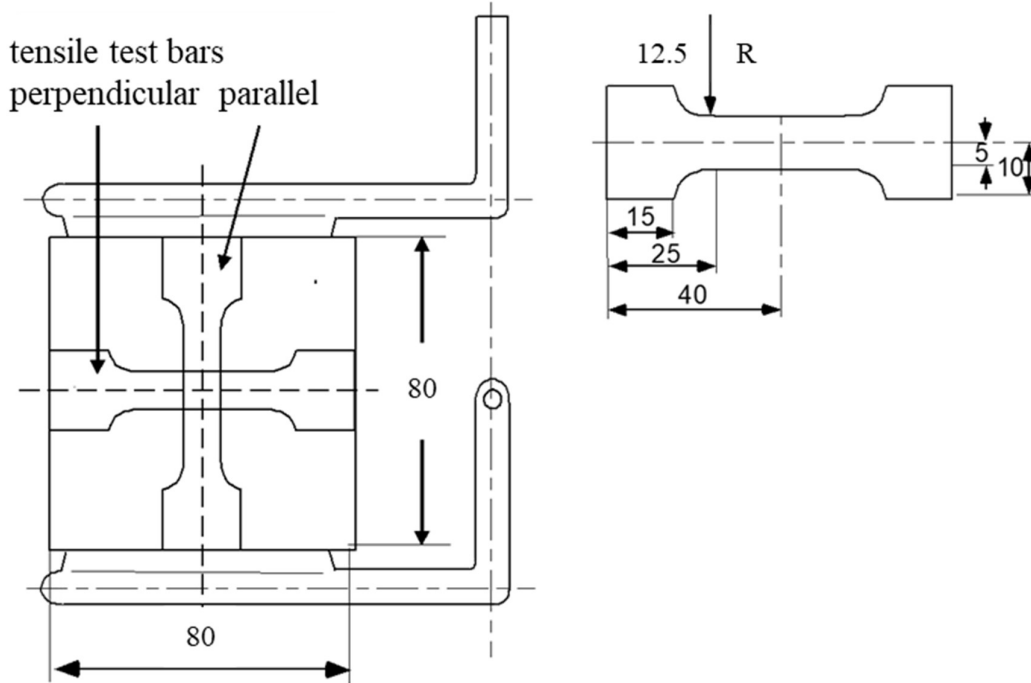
Geometry of injection molded rectangular plates having dimensions $80 \times 80 \times 2.5 \text{ mm}^3$ (left) and the tensile test bars (right) [132].
